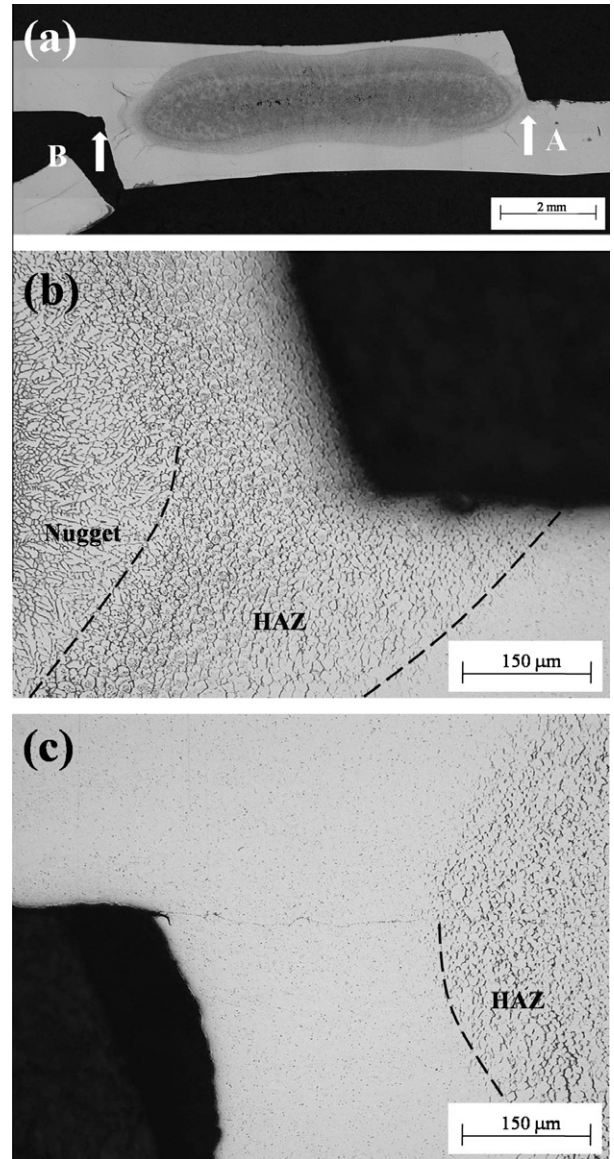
Mg/Mg spot weld after fatigue test at a maximum load of 2.0 kN: (a) overall view; (b) higher magnification image of crack initiation site A; and (c) higher magnification image of crack initiation site B.
